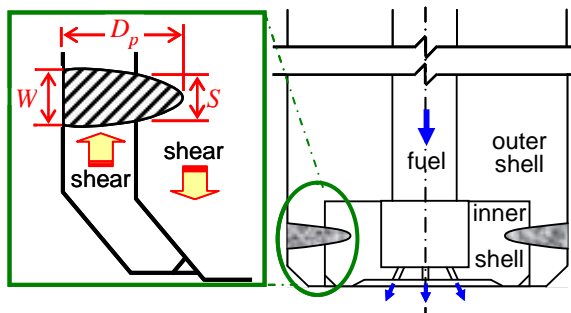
(a) weld characteristics W weld width, D_p penetration depth, S resistance length and (b) tip of the fuel injector.
